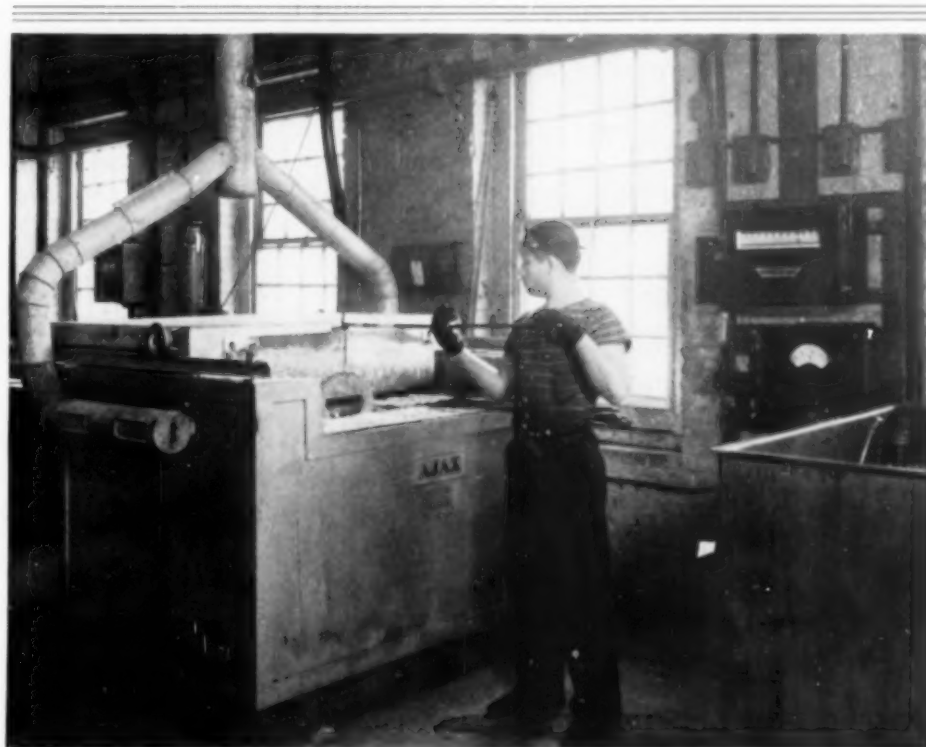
Electric Salt Bath Furnace in Heat Treating Department of Yale & Towne Mfg. Co. Operator is removing a carburized ring gear, ready for quenching in the tank at the right
